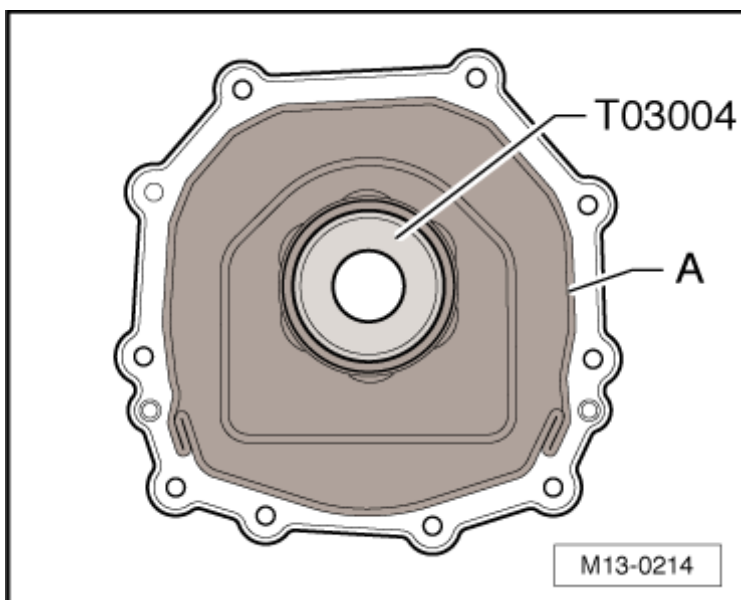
Identifying Sealant Bead Applied Into Groove Of Sealing Flange
